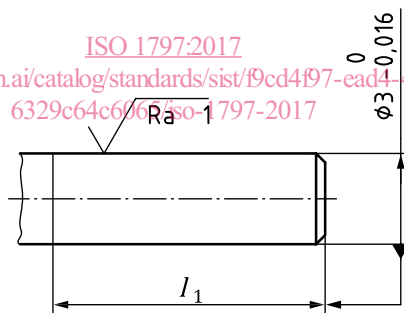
Dimensions, tolerances and surface roughness for Type 4 shank
